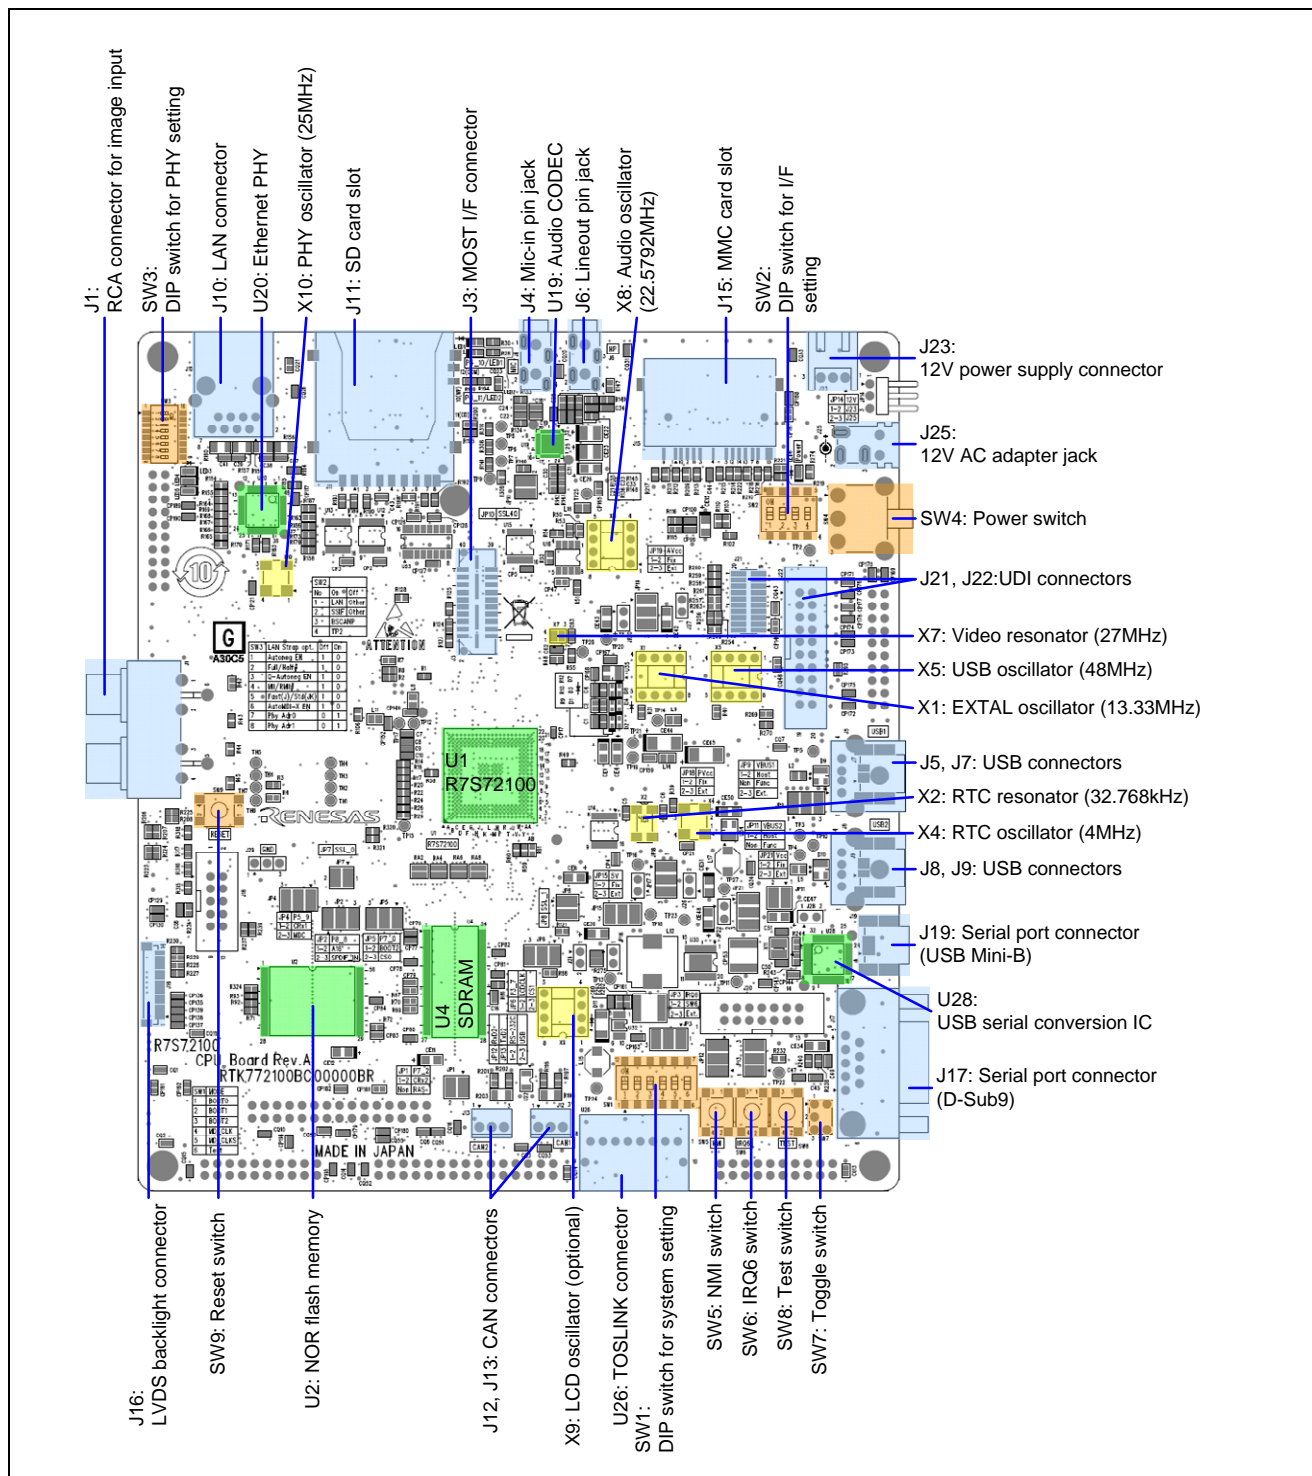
RTK772100BC00000BR Parts Layout (Top View of Component Side)
